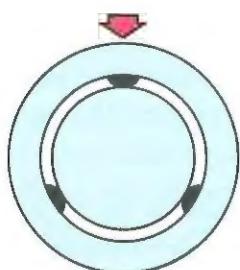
Slightly distort Bushing I.D. by exerting set screw pressure in indent at this point to produce line-to-line fit. Three-track BALL BUSHINGS only.
